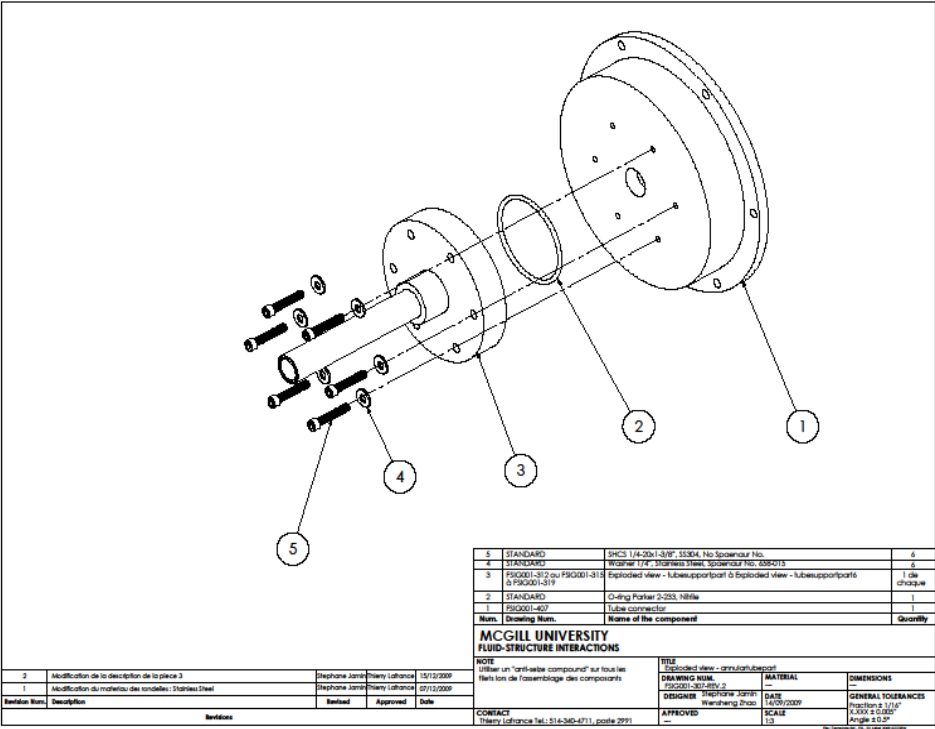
Sub-assembly drawing for the vessel: Annular tube part
